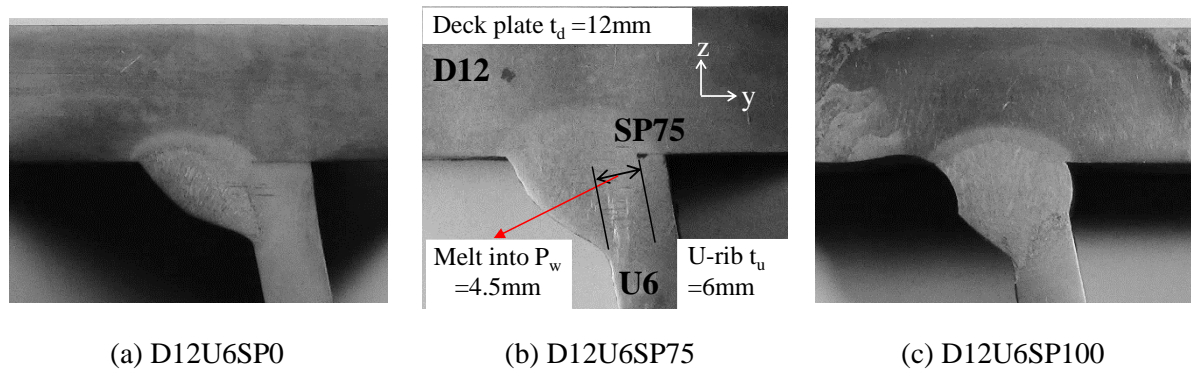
Weld joint photos of specimens in etching test
